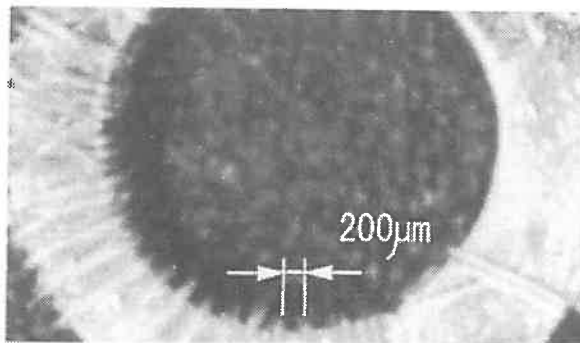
Enlarged photograph of the internal micro-gear showed in figure 13
